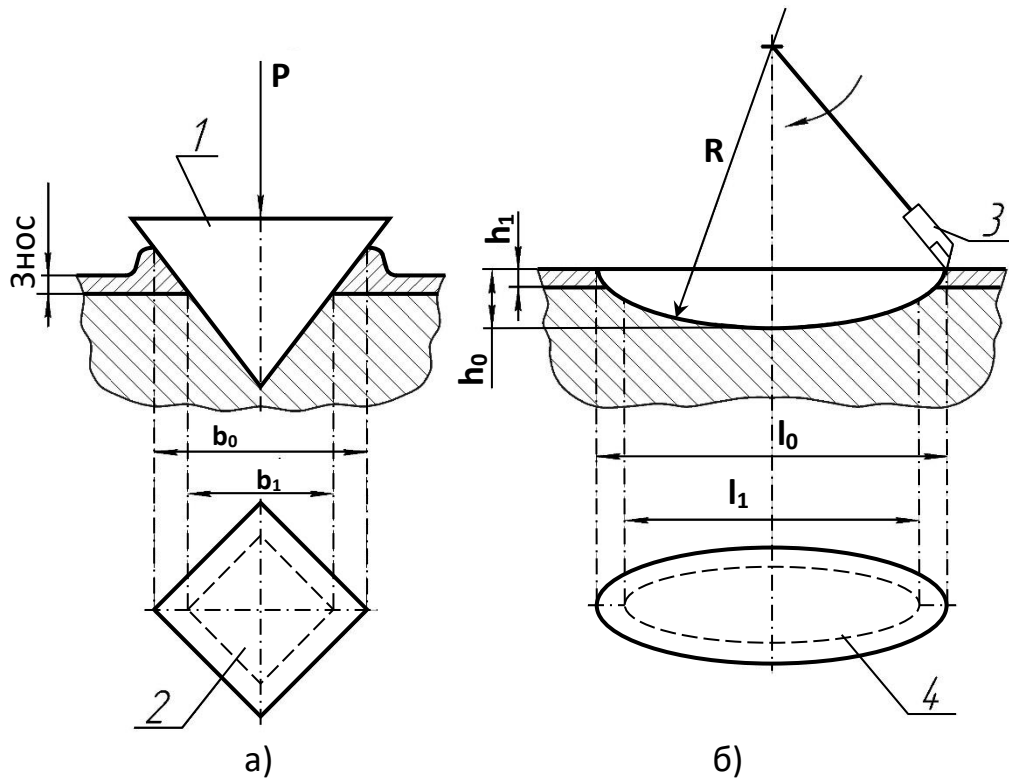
Schemes of making an impression (a) and holes (b) for determining the amount of wear of the guides: 1 – diamond pyramid; 2 – print; 3 – incisor; 4 – hole
